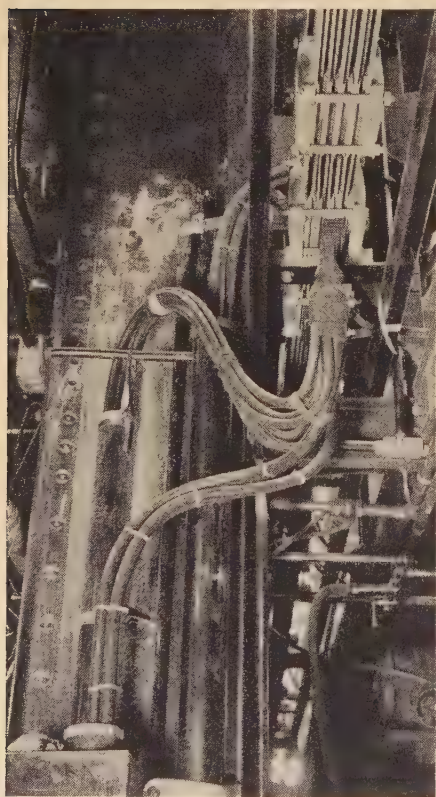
The interlaced welder bus used by company B, showing construction and method of making taps for individual welders
